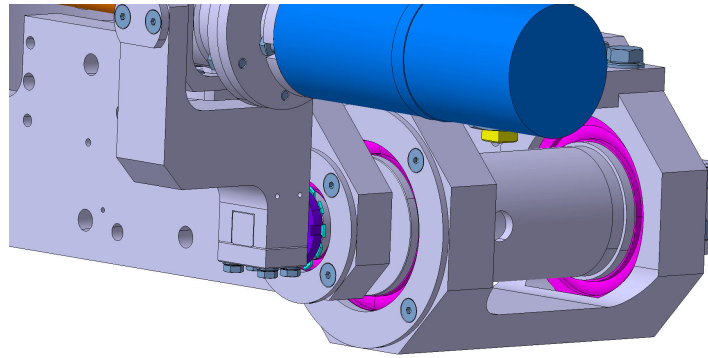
Detail of eccentric cam with rollerbearing for SPL tuner.
